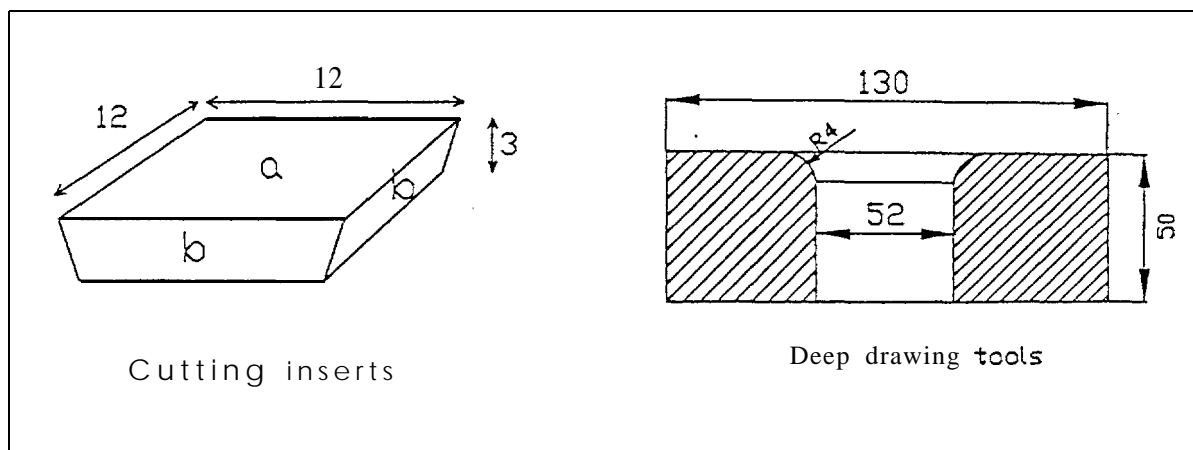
Schematic view of cutting inserts and deep drawing tool.
